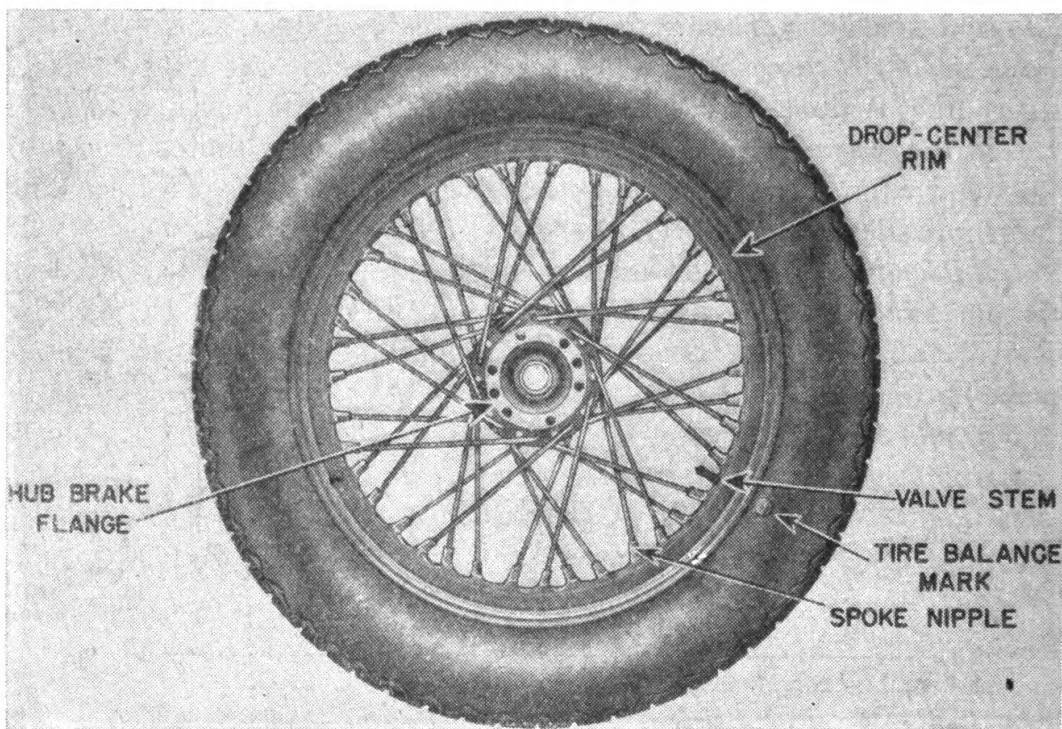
Typical motorcycle wheel with brake assembly removed.
